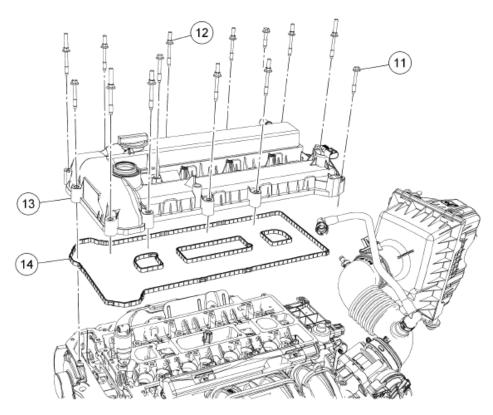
Identifying Valve Cover Components Courtesy of FORD MOTOR CO.
